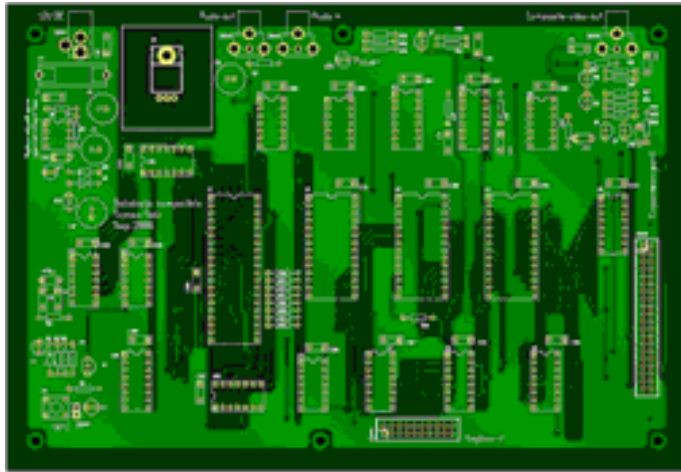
Computer motherboard is an example of Print Circuit Boards. (PCB)
